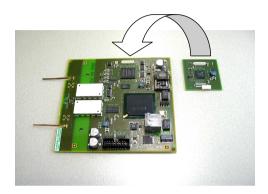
Mounting the G.729 Daughter Board onto the Main board.
